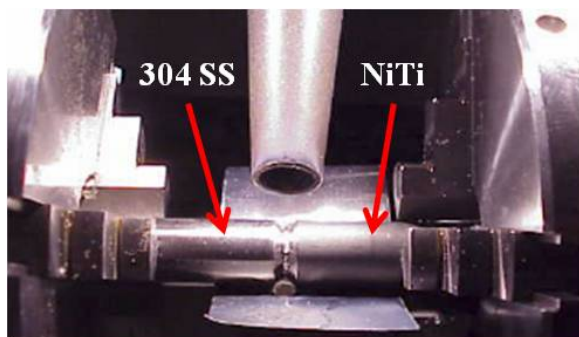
WELD SETUP OF NiTi/304 SS THICK-WALLED JOINT SHOWING INITIAL ROOT PASS AND AIR DAM.
